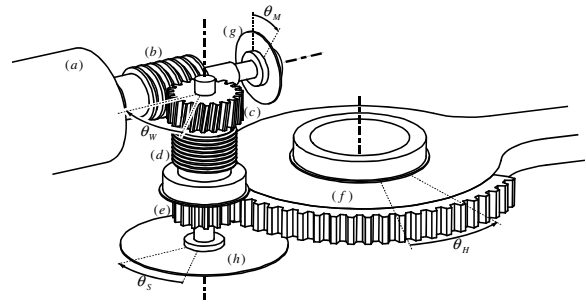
Power transmission mechanism of cRSEA[15]. (a) Maxon RE40 DC motor, (b) a worm gear, (c) a worm wheel, (d) a torsional spring, (e) a small spur gear(fifteen teeth), (f) a knee frame with a large spur gear(ninety teeth), (g) an encoder on the motor side, and (h) an encoder on the human side.
